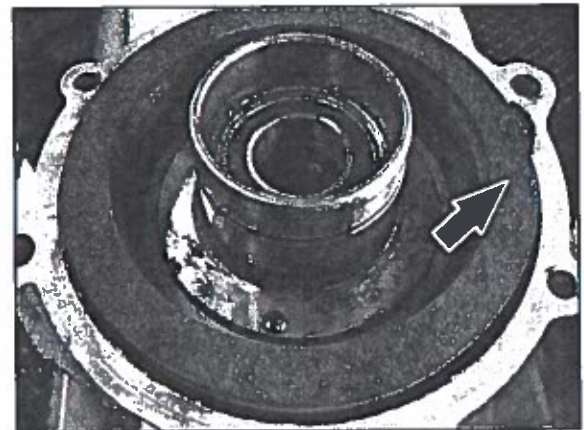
Excessive Rust/Corrosion Buildup on Edge of Coupling Body
